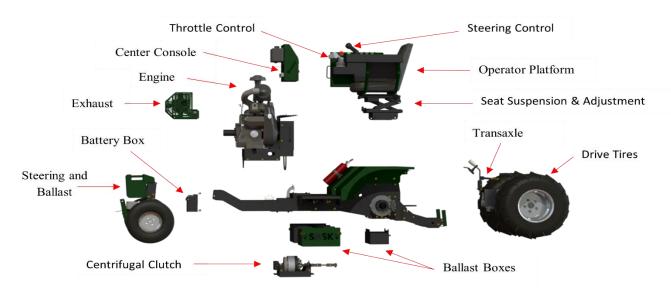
Exploded View of Sled Dogs 2023 Tractor
